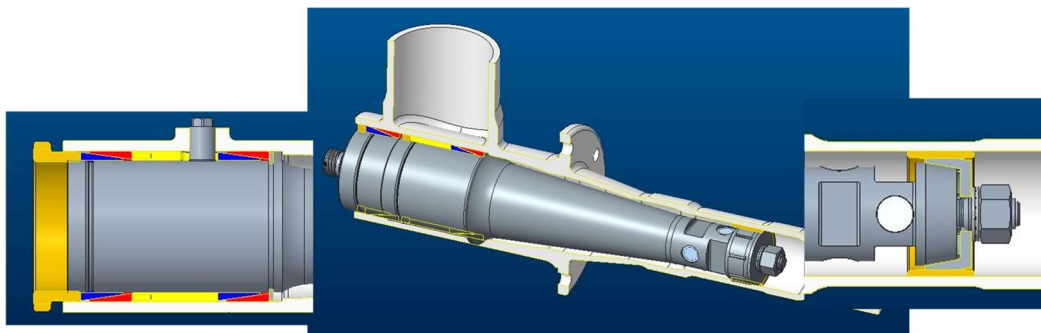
CAD representation of the load sensor within the wheel axle. Clamping elements on the left and right side are visible.
